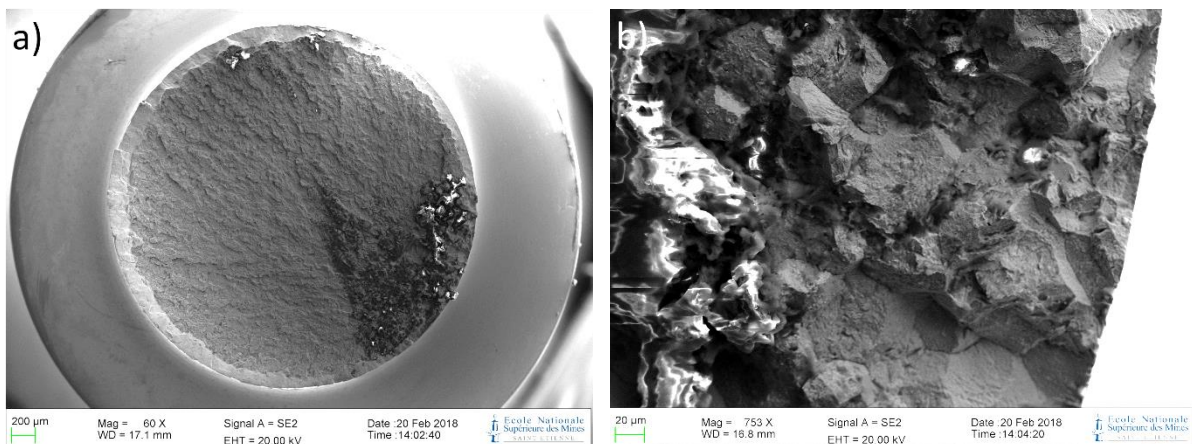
Fracture surfaces of 1500 MPa protected notch tip specimen.
